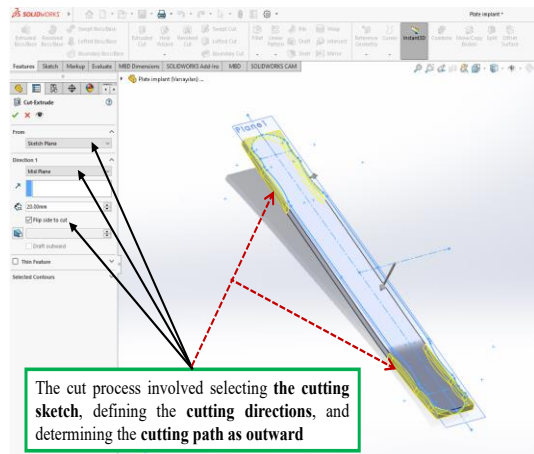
Detailed view of the cutting operation performed on the solid model of the plate implant
